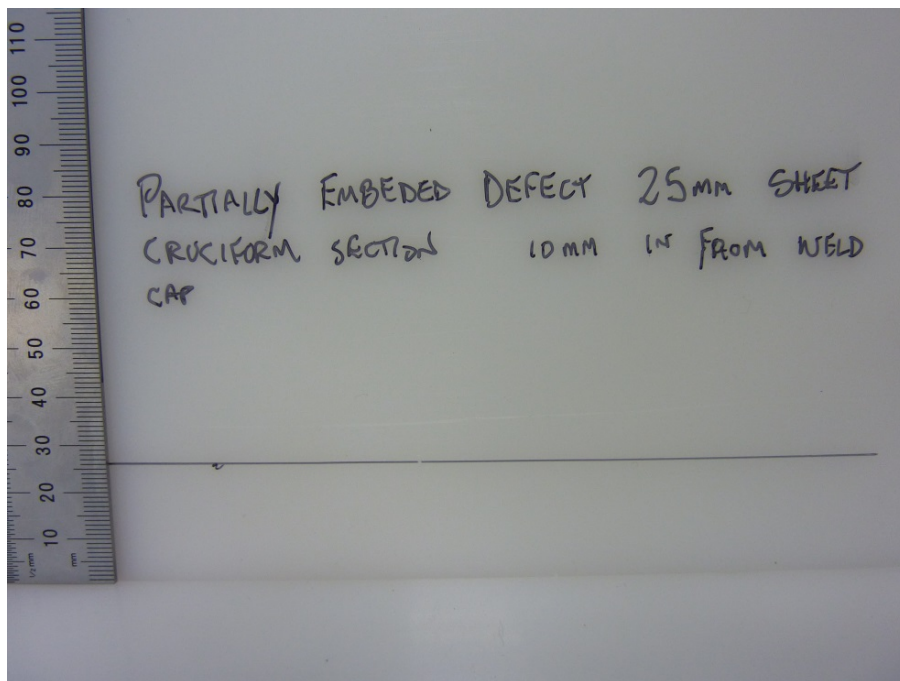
Marking the extrusion weld width on the HDPE plate.
